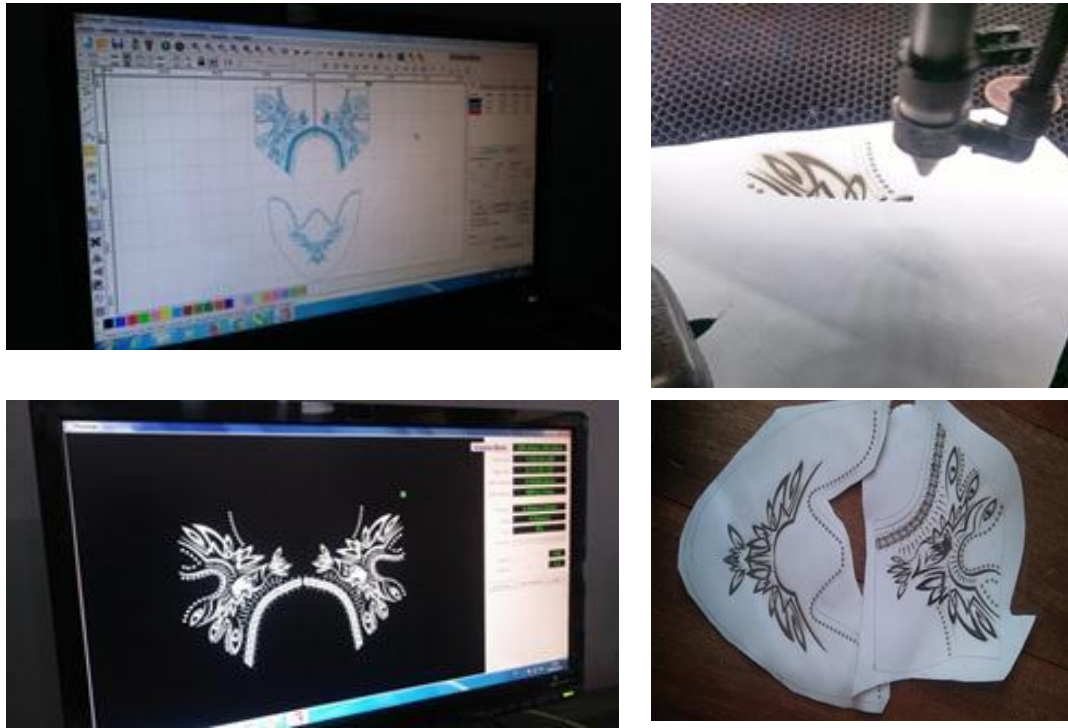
Execution process using production machines which in this case use laser machines (Laser Cutting / Engraving Machine)
